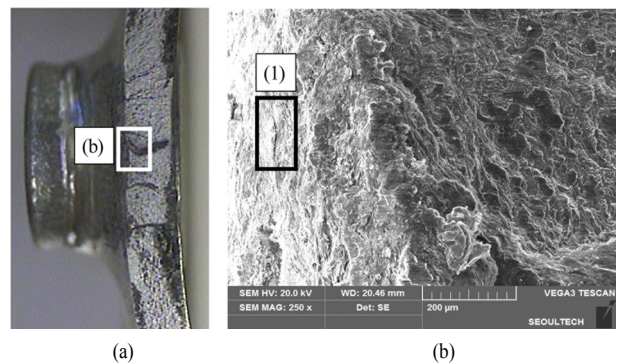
Side view of fracture surface about tensile-shear mode specimen under high-loading condition ( $P_{max} = 2882.0 \text{ N}$ ).
